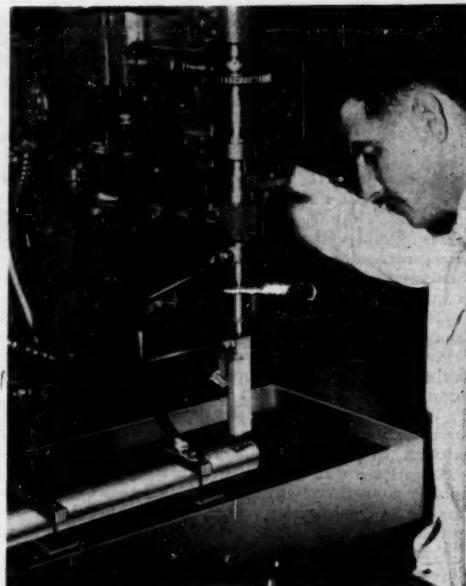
METHOD X MACHINE FOR PERFORMING MACHINING OPERATIONS
